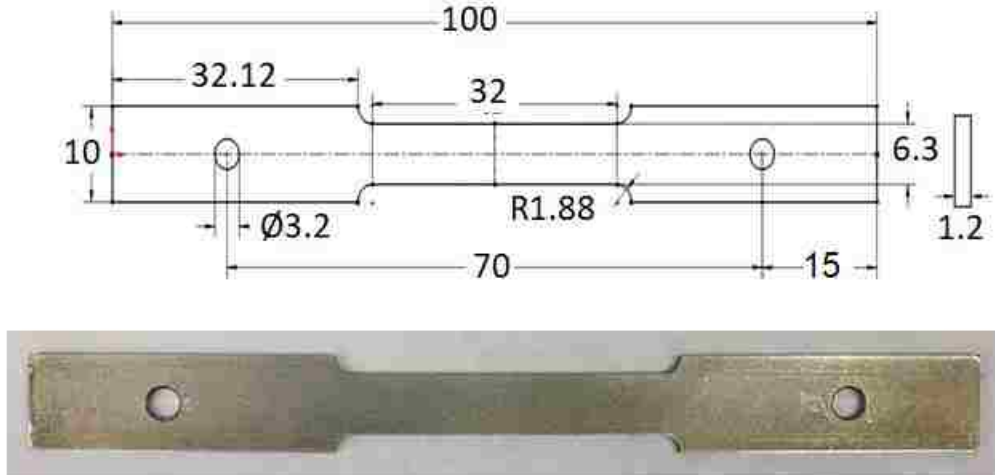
The sample geometry (top - all dimensions are in mm). and a photograph (below) of a creep specimen.
